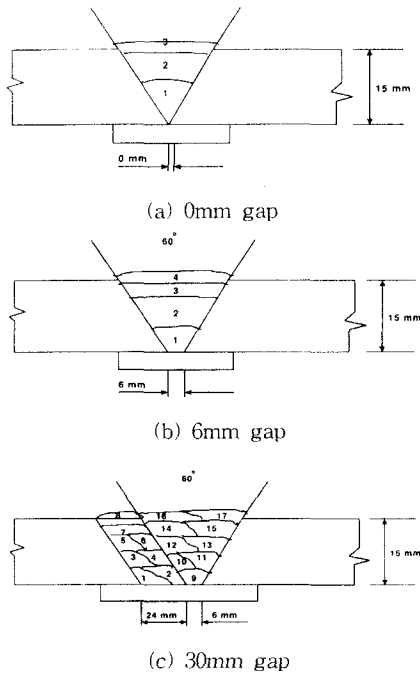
Shape of cross section and welding process in weld specimen
